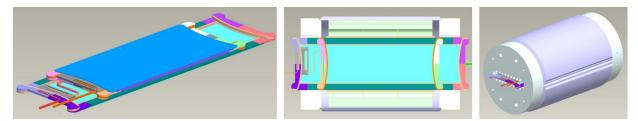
Two OP/UP coils with staggered ends nested together (left); section view of two OP/UP coils in DCC017 (middle); and rendering of the two OP/UP coils assembled in the magnet DCC017. The design allows installation of two insert coils in a future follow-on program.
